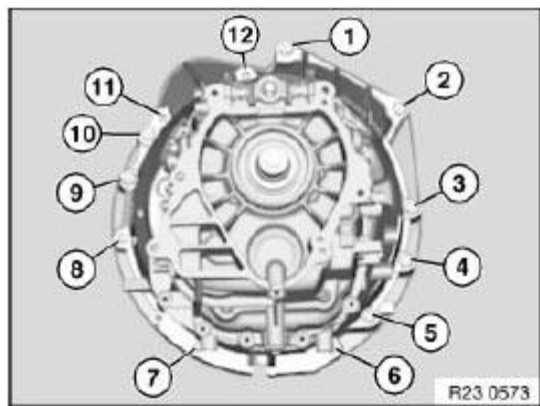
Identifying Transmission Bolts Tightening Sequence
